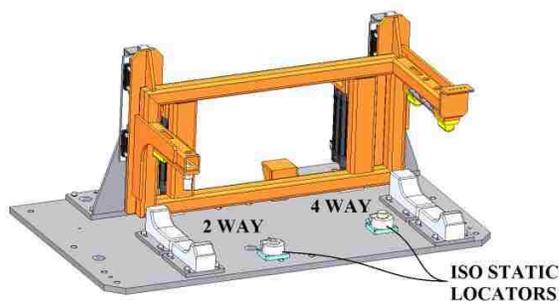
ISO Pin Assembly on Tank Fixture (Courtesy SPM Automation (Canada) Inc.)
